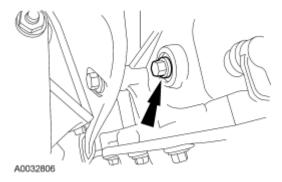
Locating Engine Plug Bolt Courtesy of FORD MOTOR CO.
